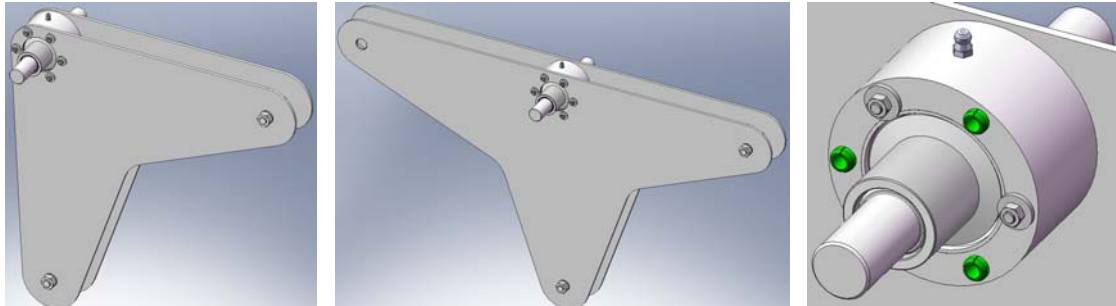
left: tumbler, weight: approx. 9,7 kg
